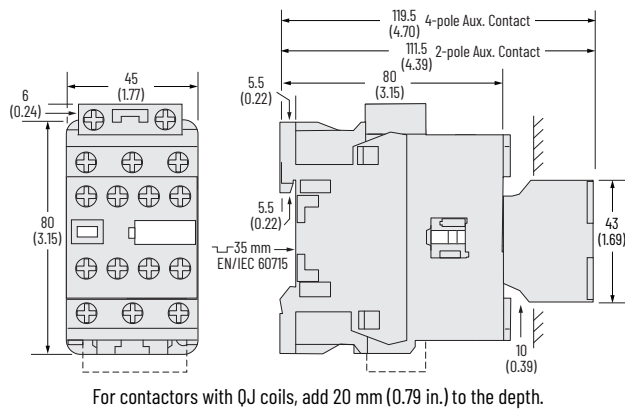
100-E26...100-E38 3-Pole Contactors with Standard Coils and Side-mounted Auxiliary Contact
